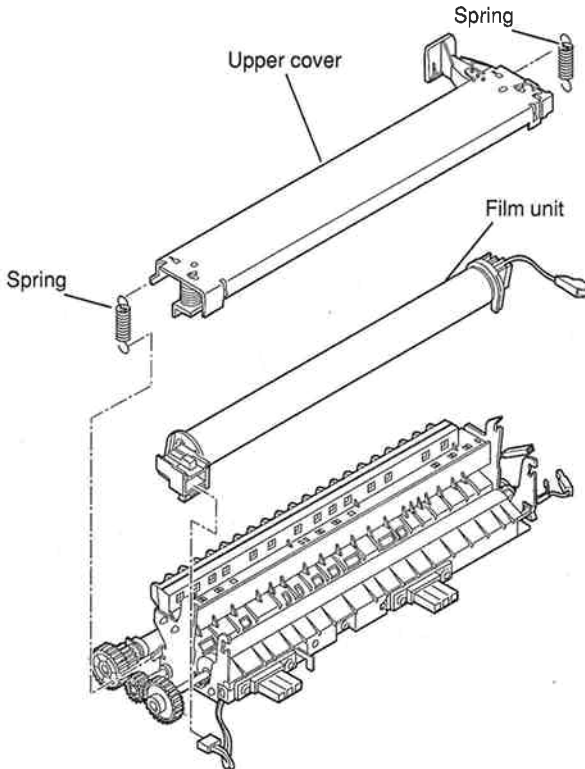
Disassembly Procedure (Fixing Film Unit)
